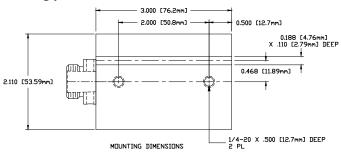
Mounting holes and keyway slot dimensions shown on the bottom of the headstock.
